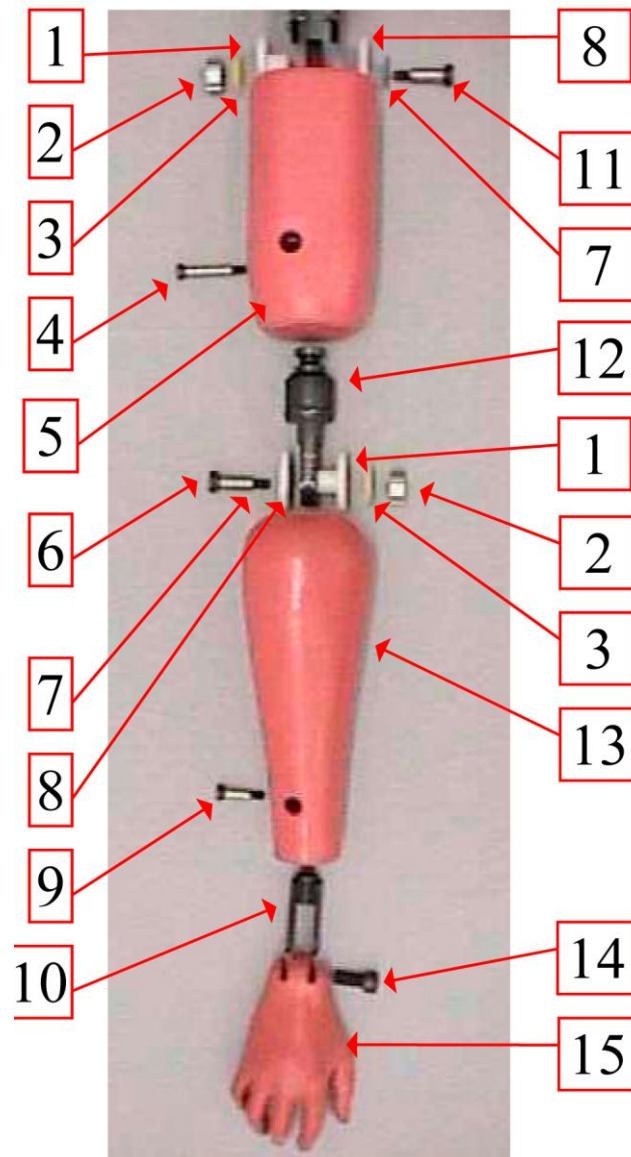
ARM ASSEMBLY, EXPLODED VIEW
